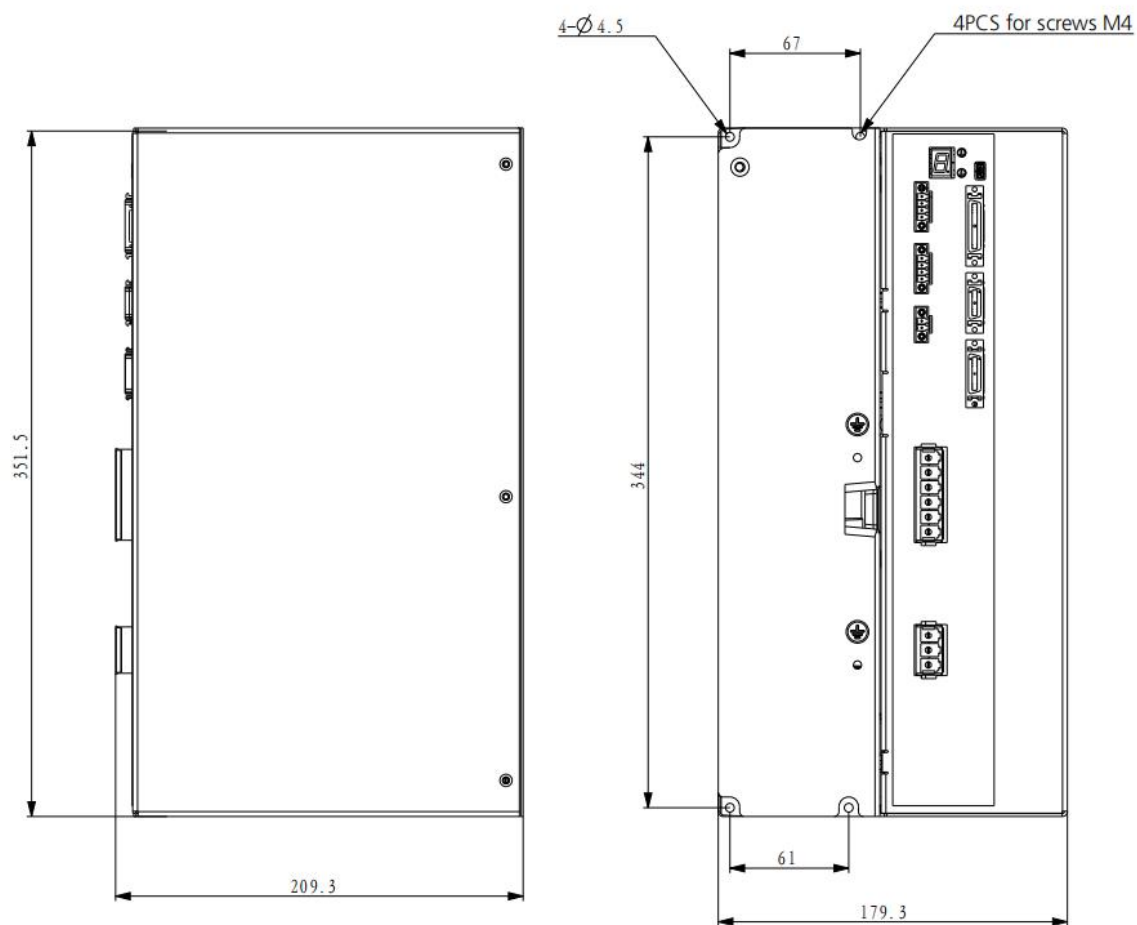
CDHD2S-040 (high-voltage) - dimensions (mm)
